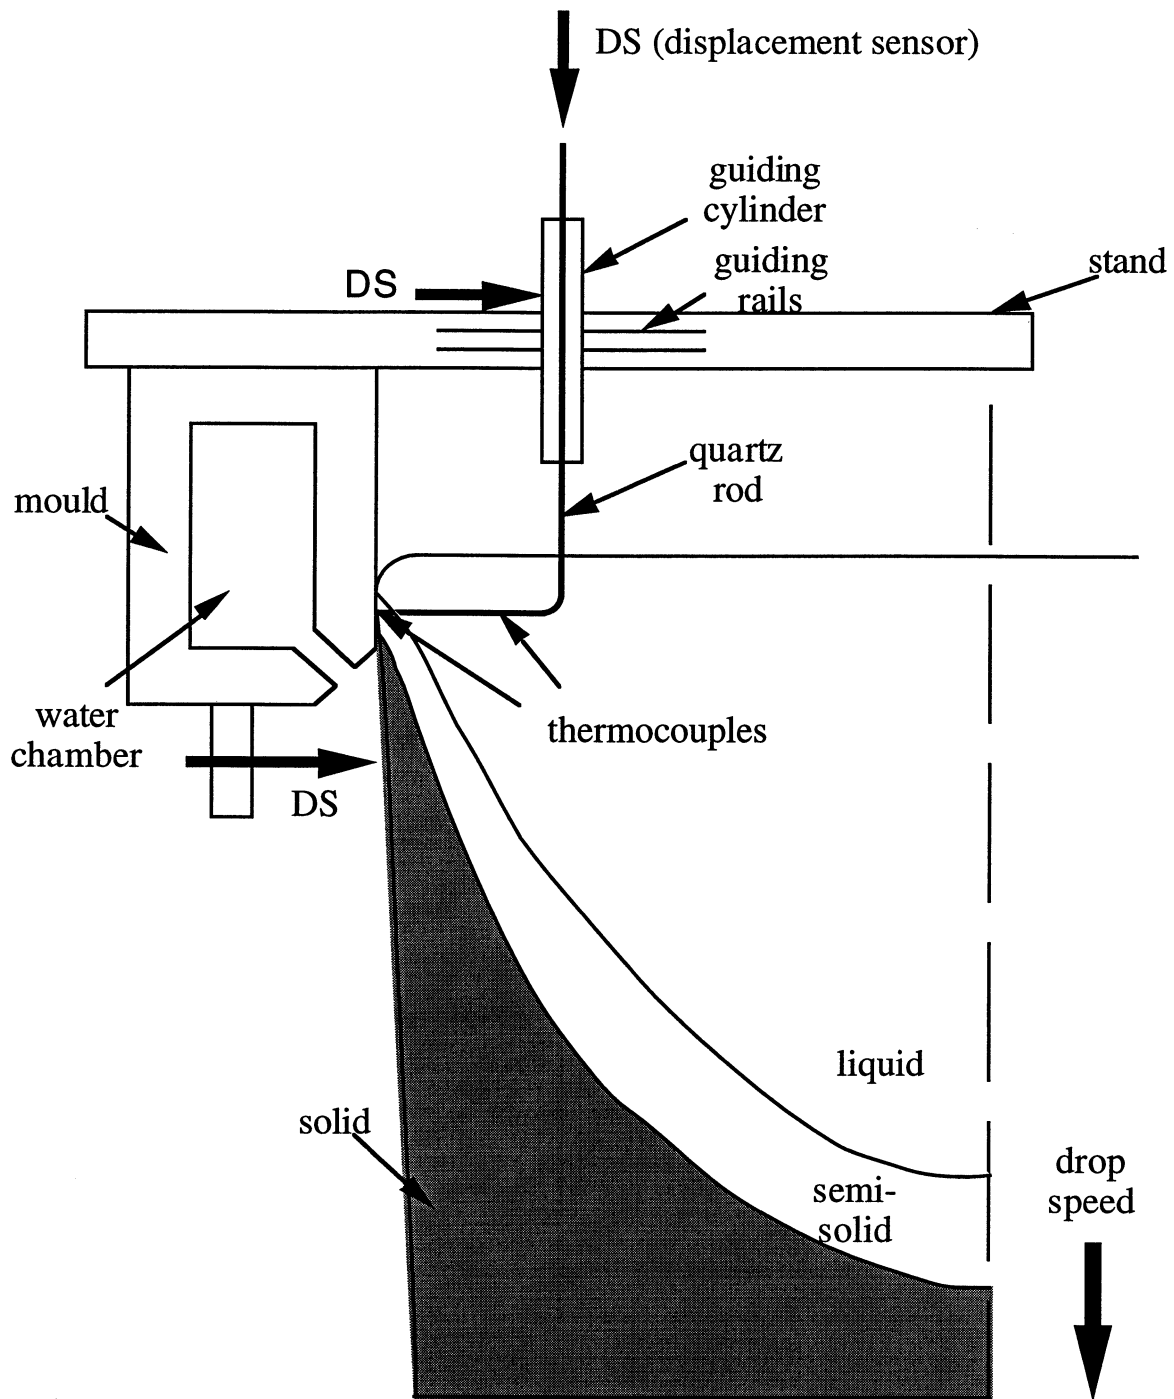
experimental set-up for the in-situ measurement of the casting displacement inside the mould/inductor.
